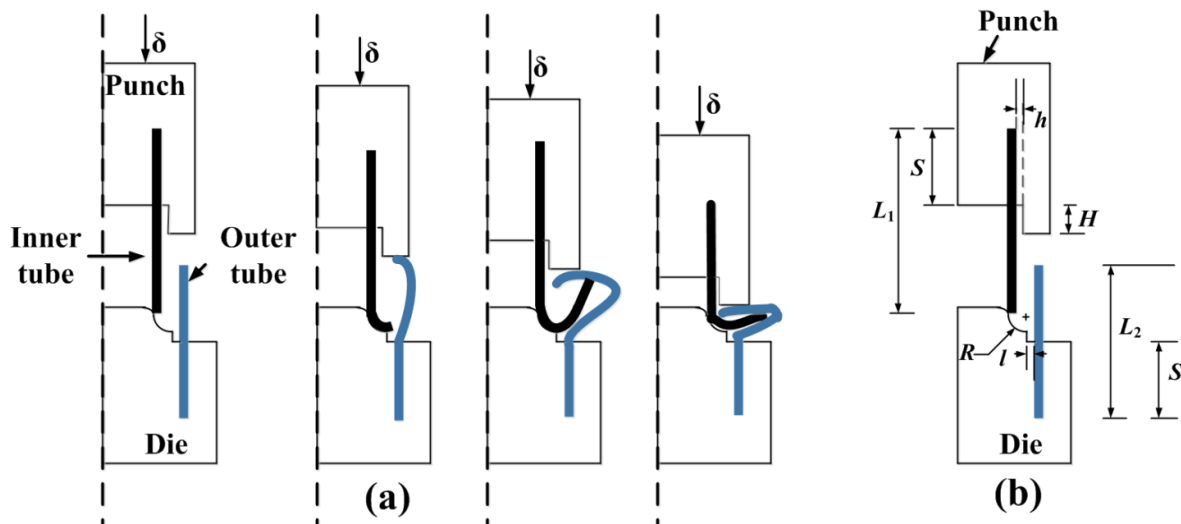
End-to-end joining of tubes, (a) step by step schematic of tube-to-tube joining (not to scale), (b) definition of process parameters
